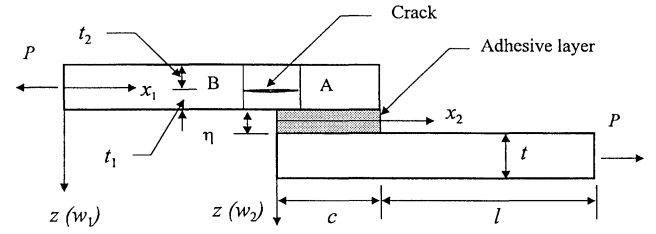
Adhesive-bonded composite single lap joint with an embedded crack.
